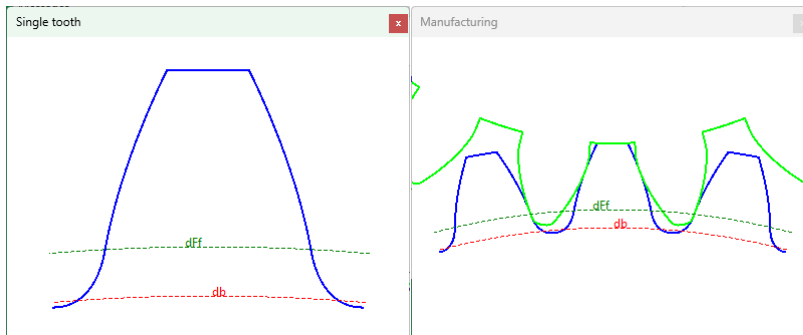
Left: Tooth form. Right: Manufacturing with shaper cutter.
